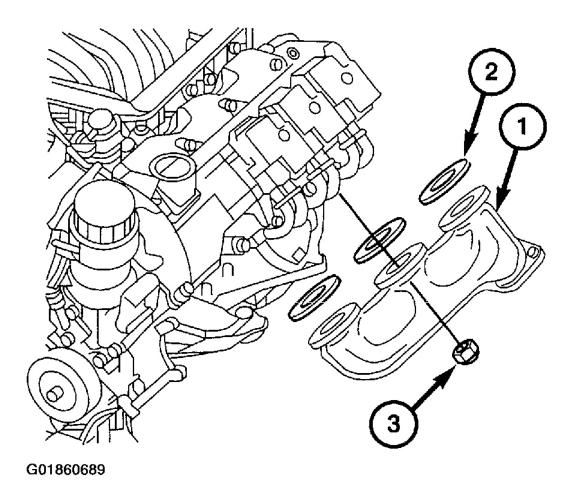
Removing Right Side Exhaust Manifold Courtesy of DAIMLERCHRYSLER CORP.
